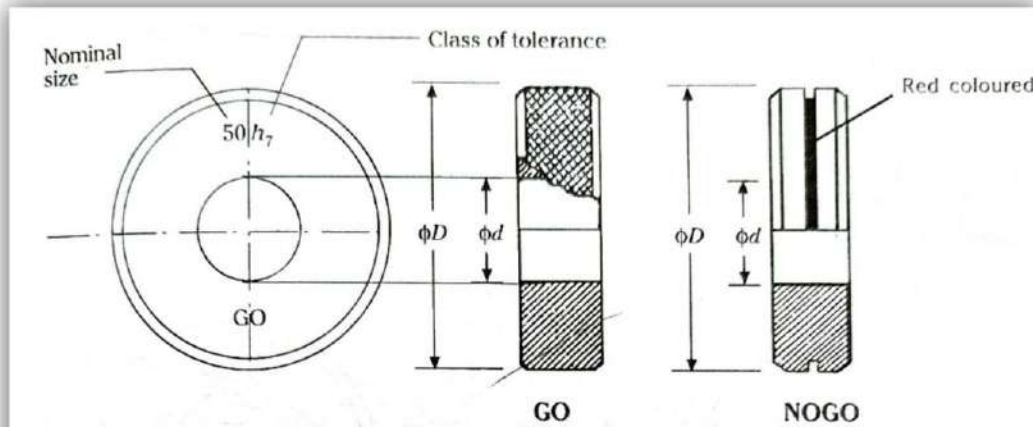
GO and NO GO Ring Gauges for Dimensions 3 to 70 mm
